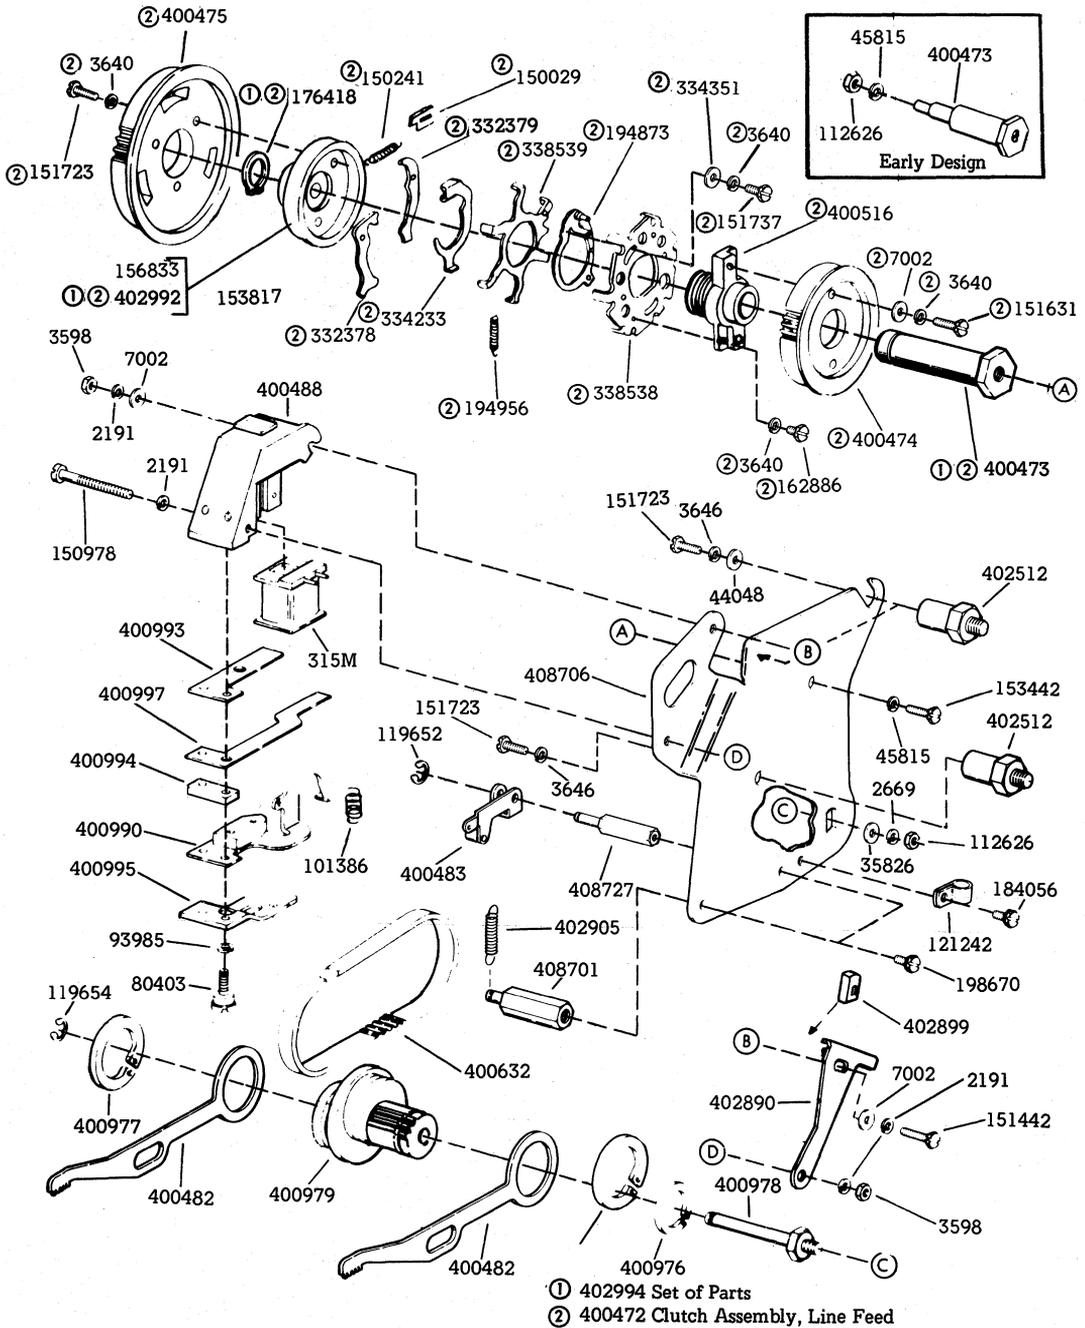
Line Feed Assembly (Forms Access - Tractor Feed)
